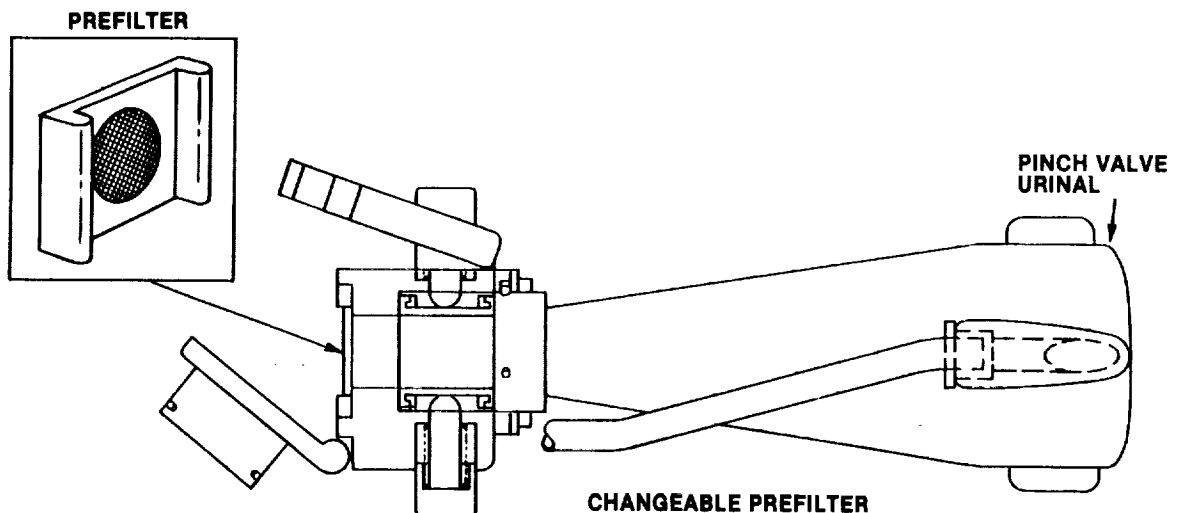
URINAL/PINCH VALVE ASSEMBLY
